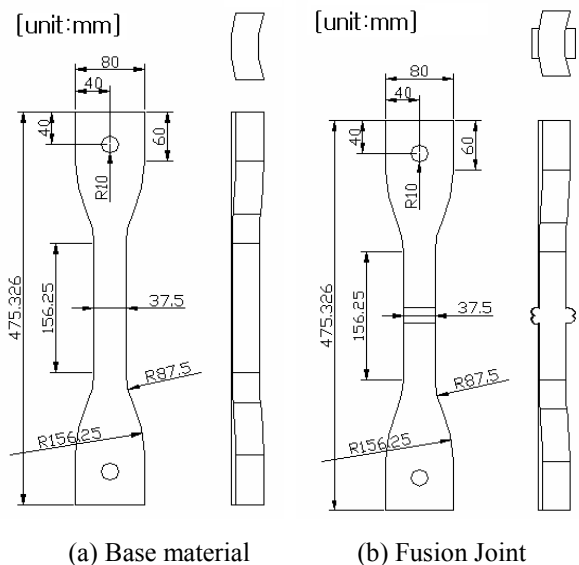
Schematic configurations and dimensions of the fatigue test specimens.
